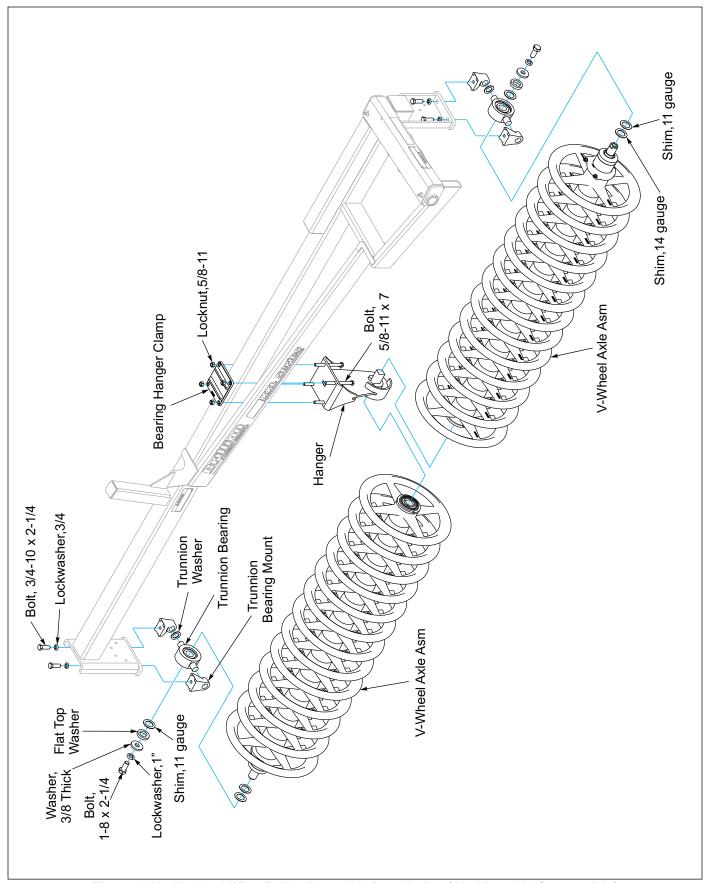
V-wheel Wing Roller Assembly Installation (42, 44 and 46 foot models)
